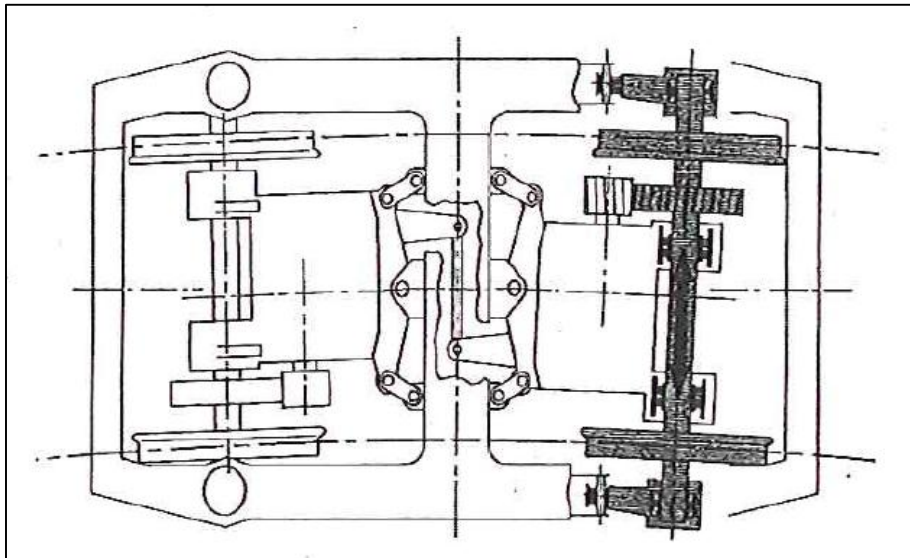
Concept of shifting axle drive (Meier & Schrader, 2001).
